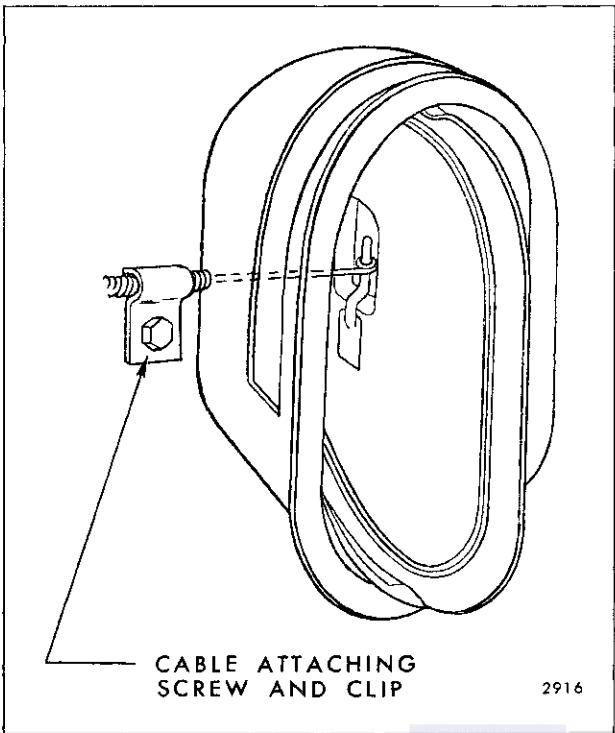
Shroud Side Air Outlet Duct Assembly —
